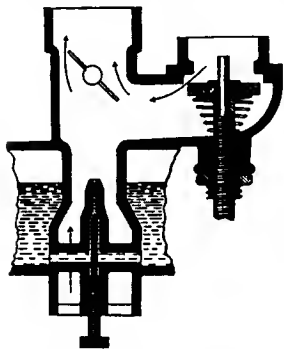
Typical Automatic Carbureter. Primary air opening is fixed. A needle valve controls the spray orifice. Spring tension and lift of auxiliary air valve are separately adjustable.
